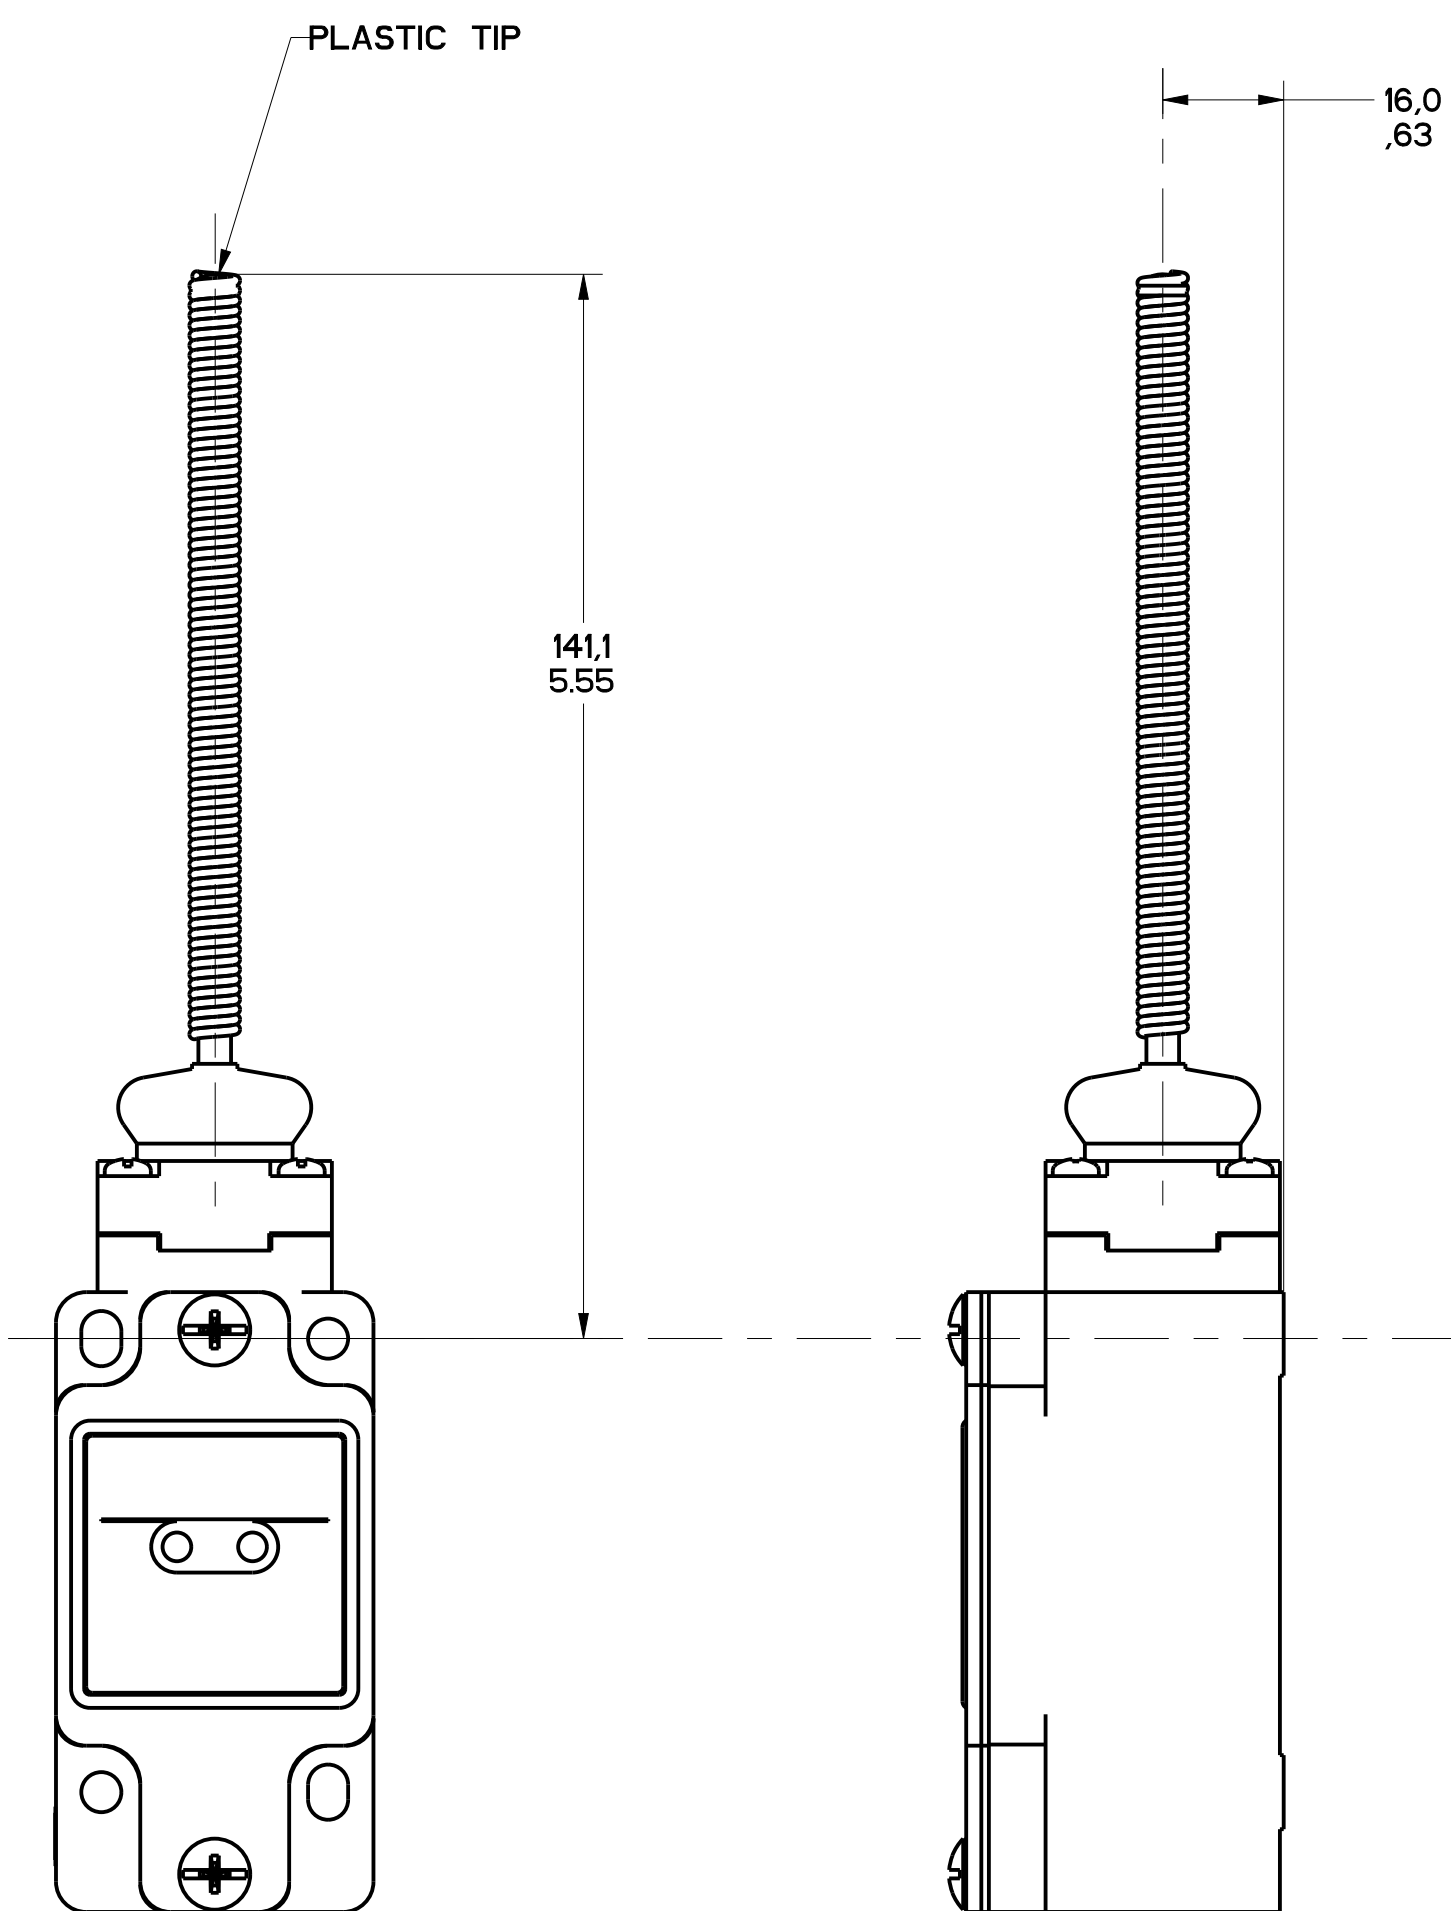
WOBBLE HEAD, AND CAT WISKER HEAD
